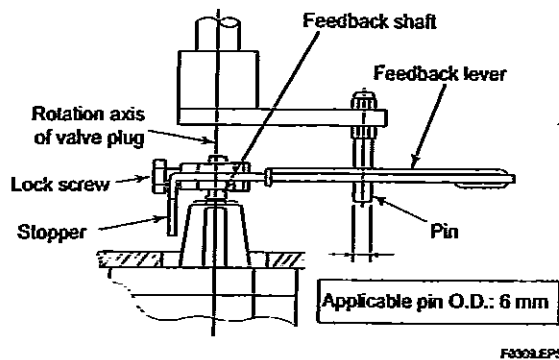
Inserting Pin into Hole of Feedback Lever
